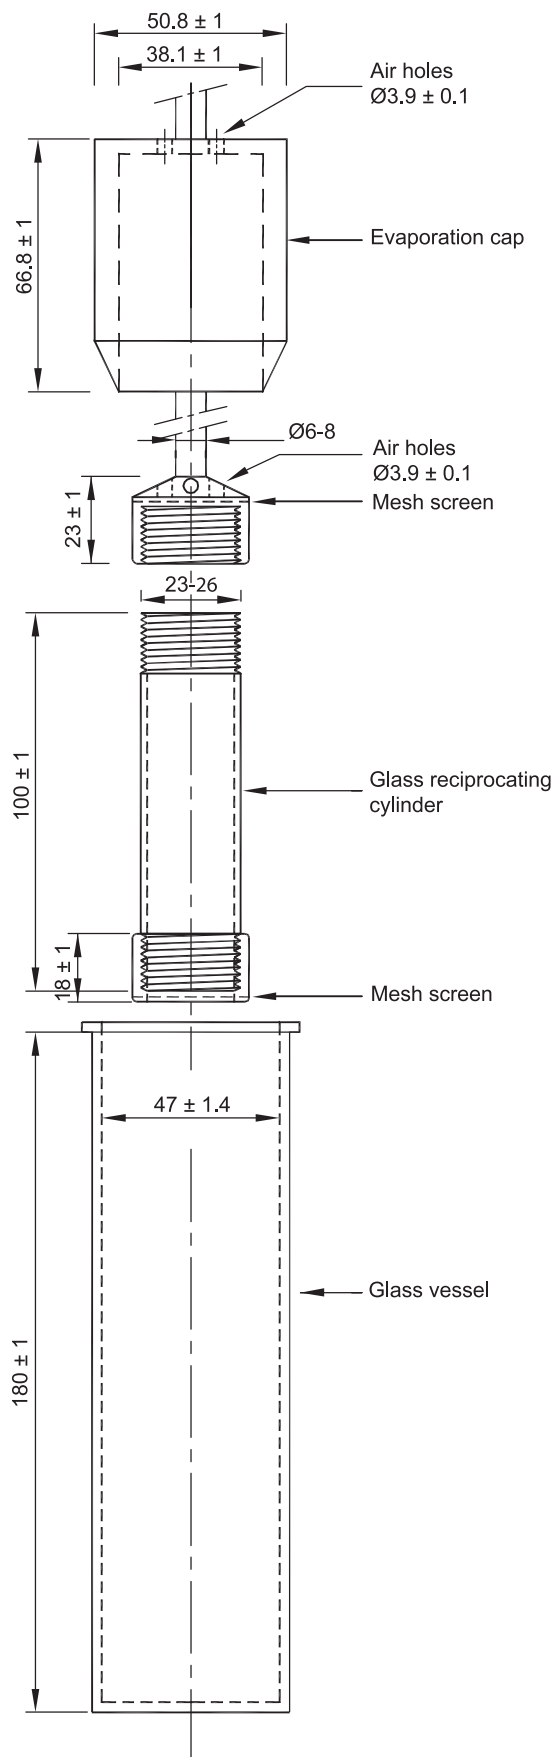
4. – Apparatus 3, glass vessel and reciprocating cylinder
